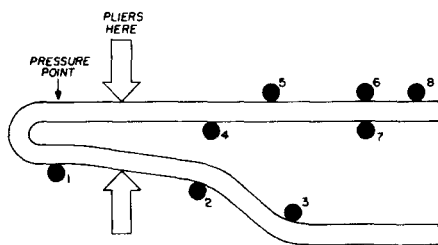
Jig layout for making soldering tips for Weller soldering guns.
